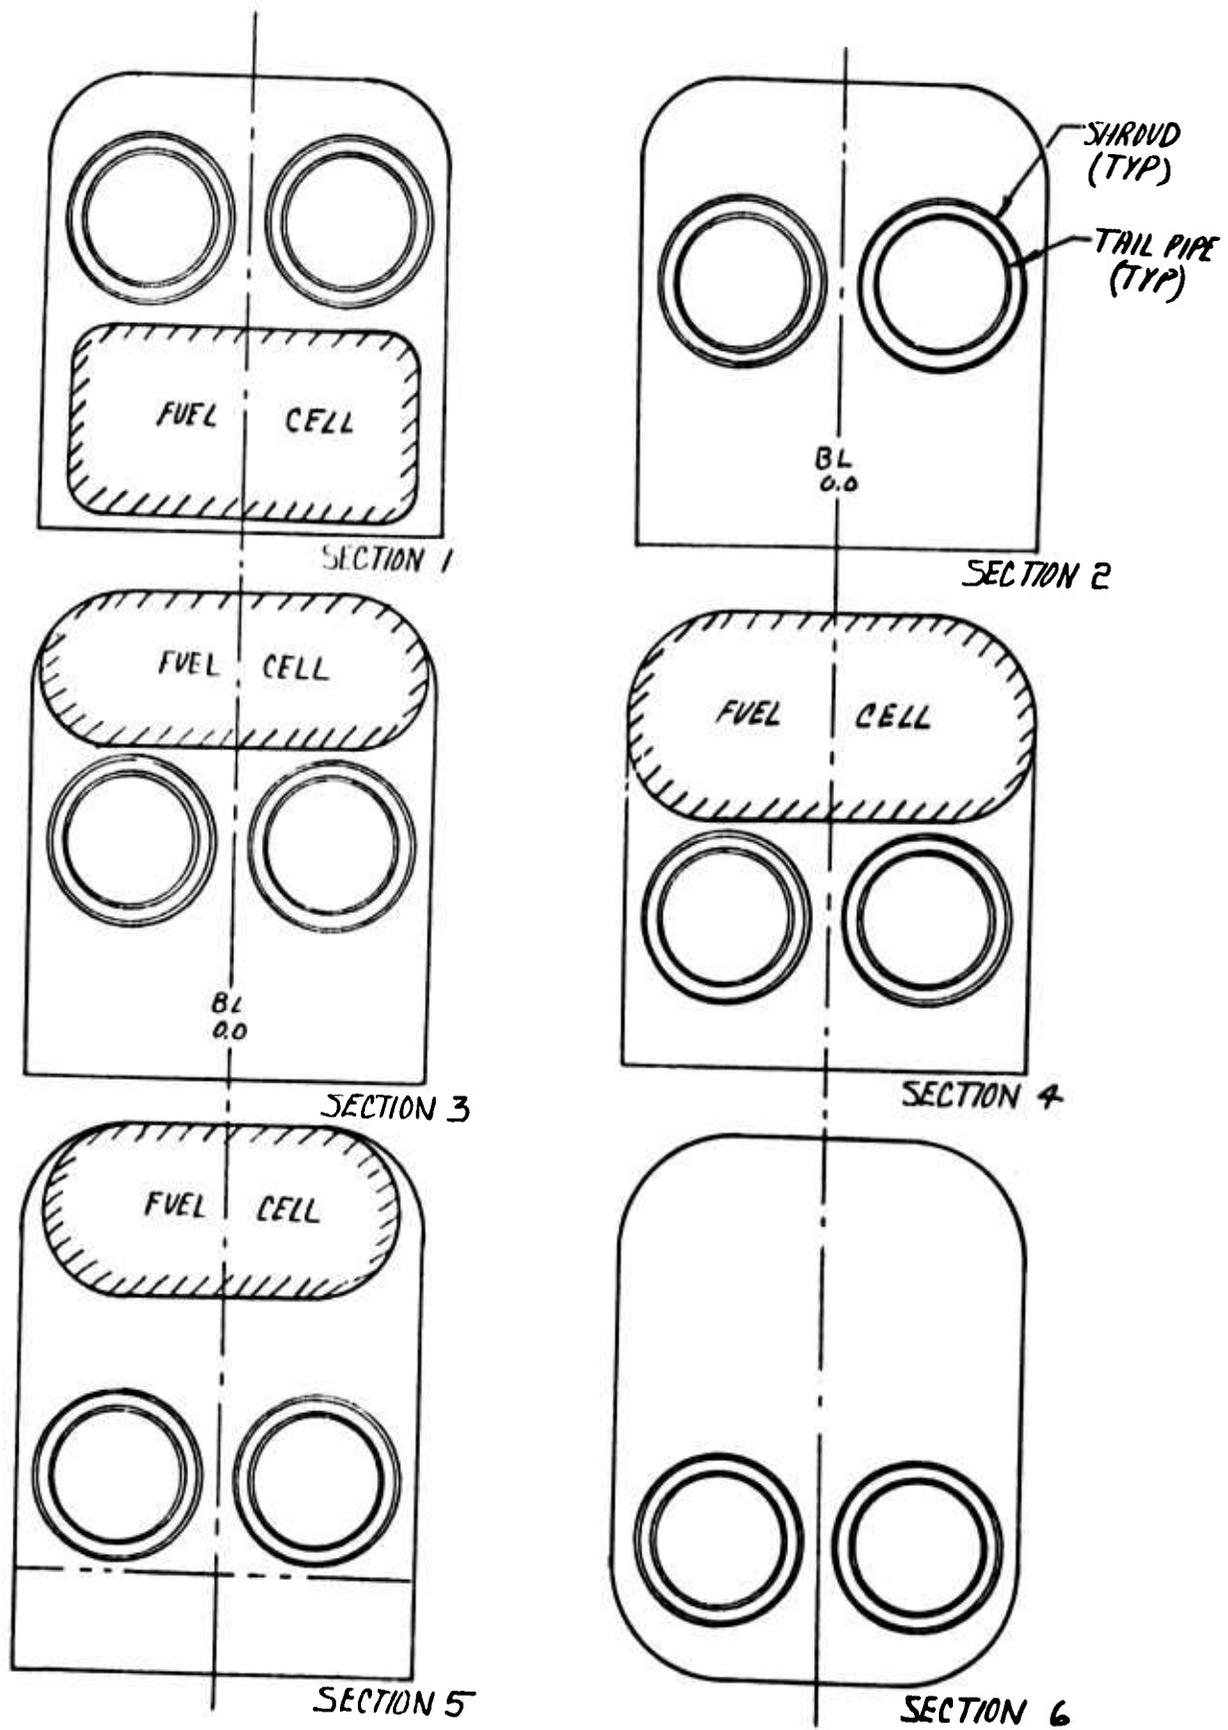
Heating and Cooling Schematic - Aft Fuselage Sections
